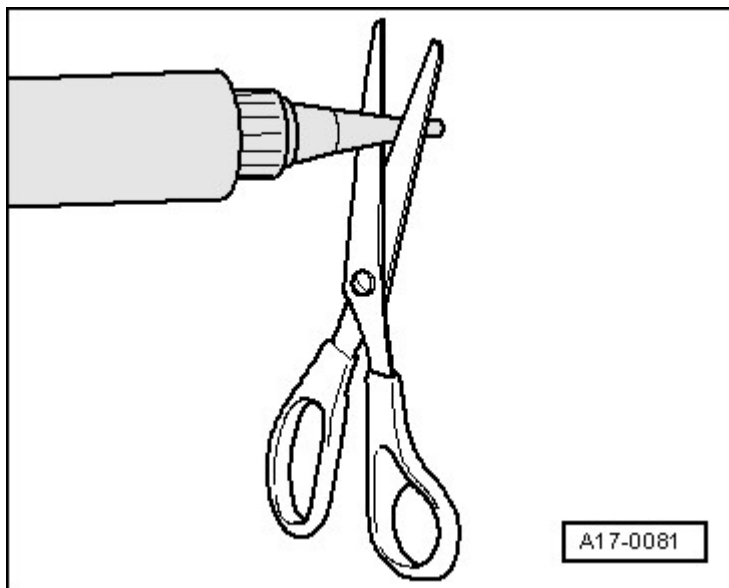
Cutting Tube Nozzle At Front Marking (Nozzle Diameter Approx. 2 Mm)
